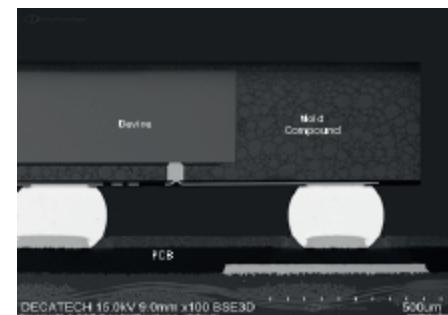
Chips face-up fan-out package, mounted to a printed circuit board.
